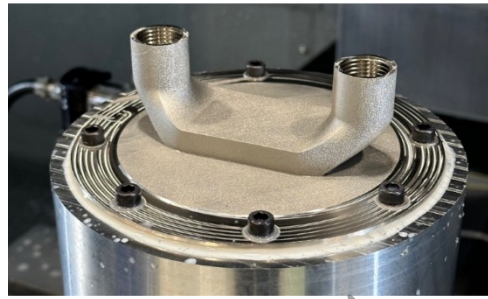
3D-printed SS 316L beam dump after post-machining.
